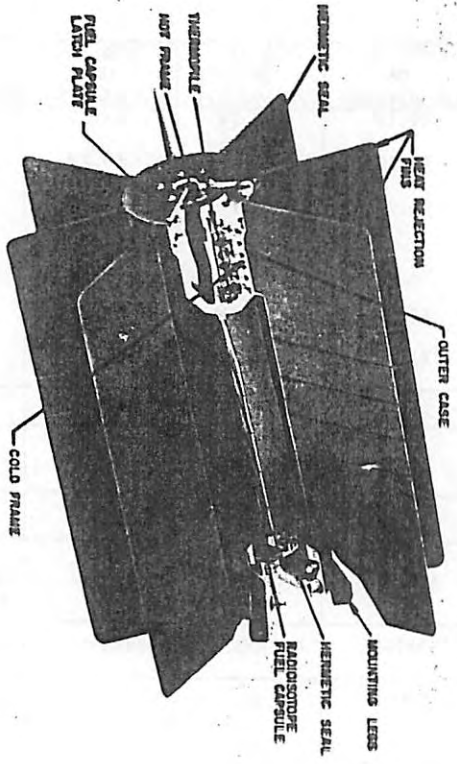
Isometric Cutaway of an Integrated Power Unit Showing Thermopile and Fuel Capsule Assembly.
